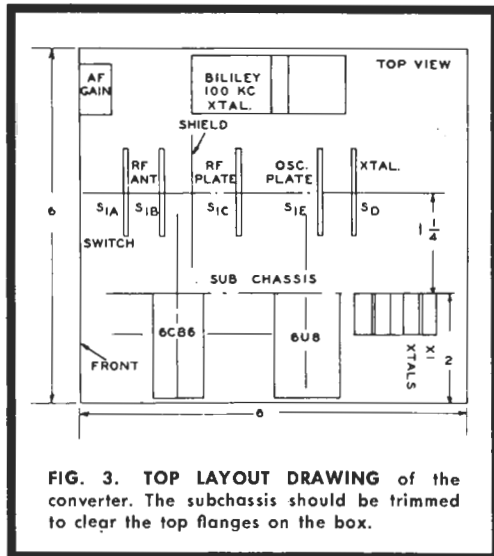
TOP LAYOUT DRAWING of the converter. The subchassis should be trimmed to clear the top flanges on the box.
